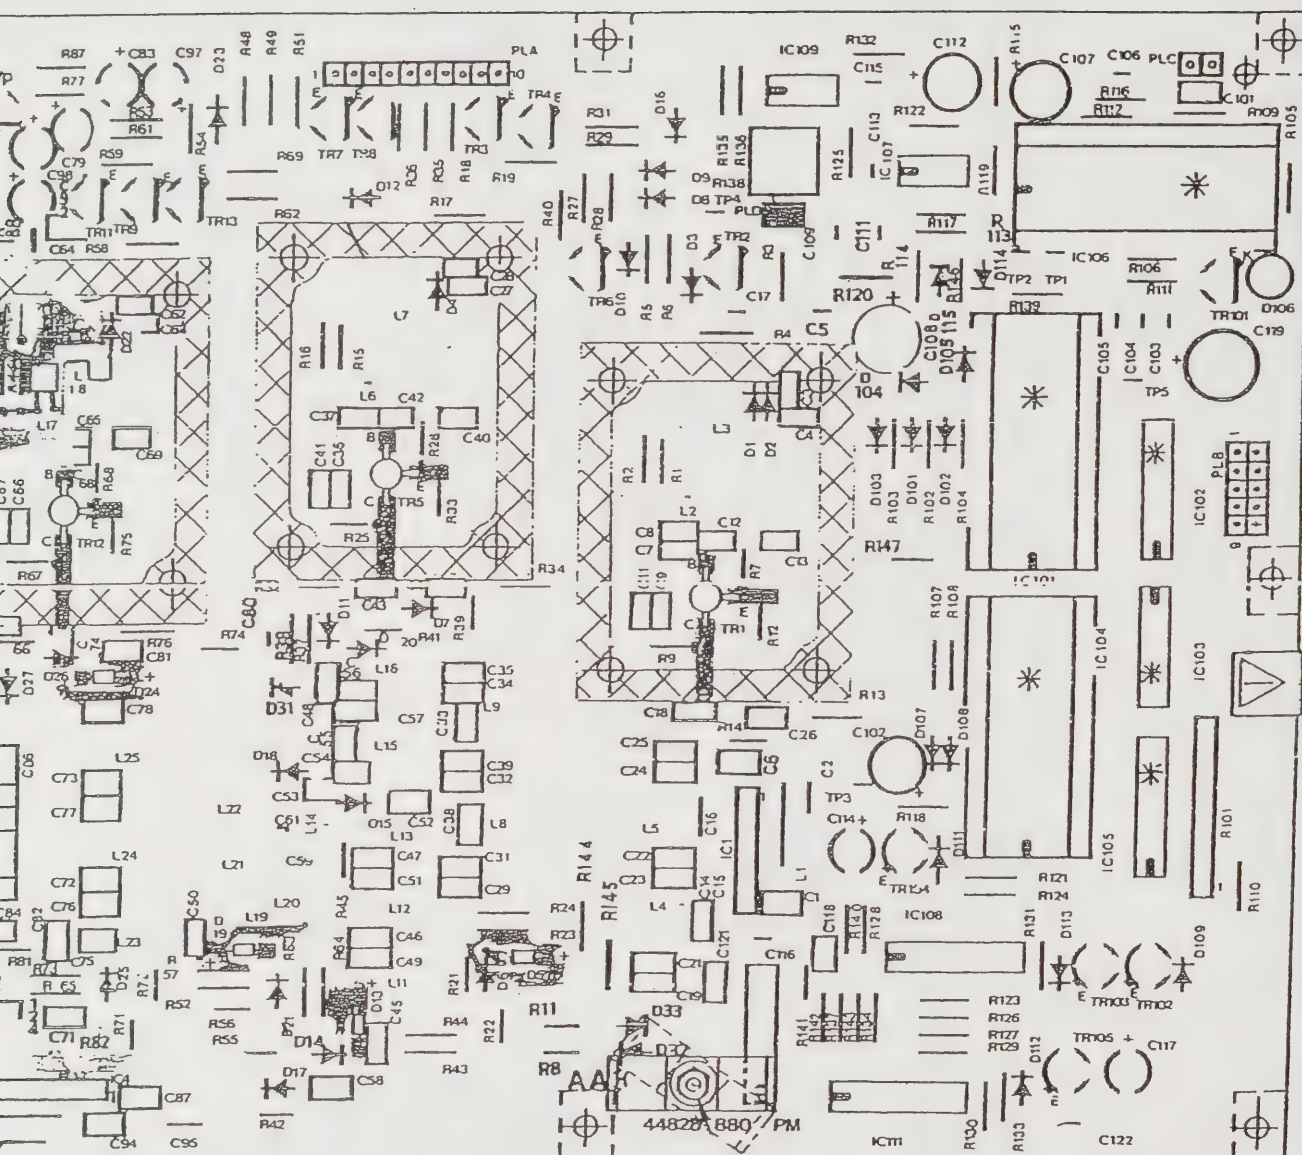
Component layout of RF synthesizer and oscillator board
